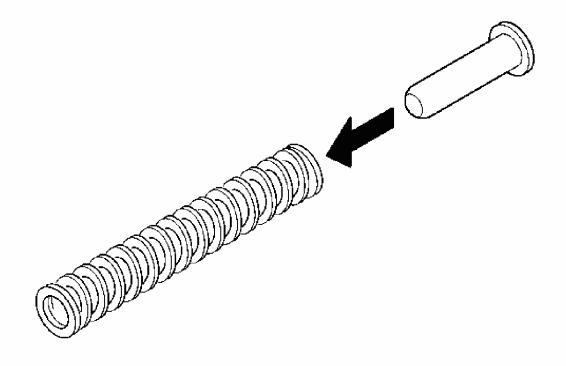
Spring Guide & Tilt Spring Courtesy of GENERAL MOTORS CORP.
